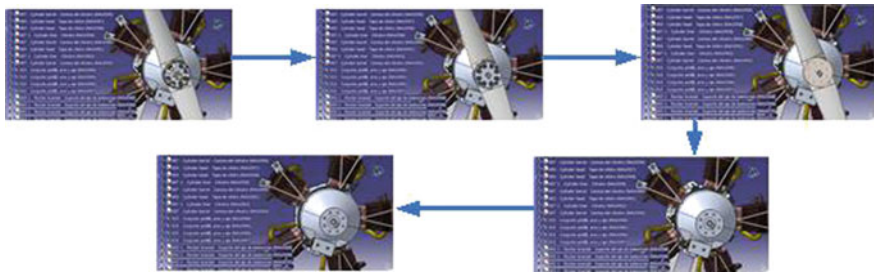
First-level component disassembly, disassembled parts are blade, propeller strut and rotor. Detailed disassembly order is: initial state—disconnect fixed nut—disconnect blade fixed disk—disconnect paddle α —disconnect propeller strut β
